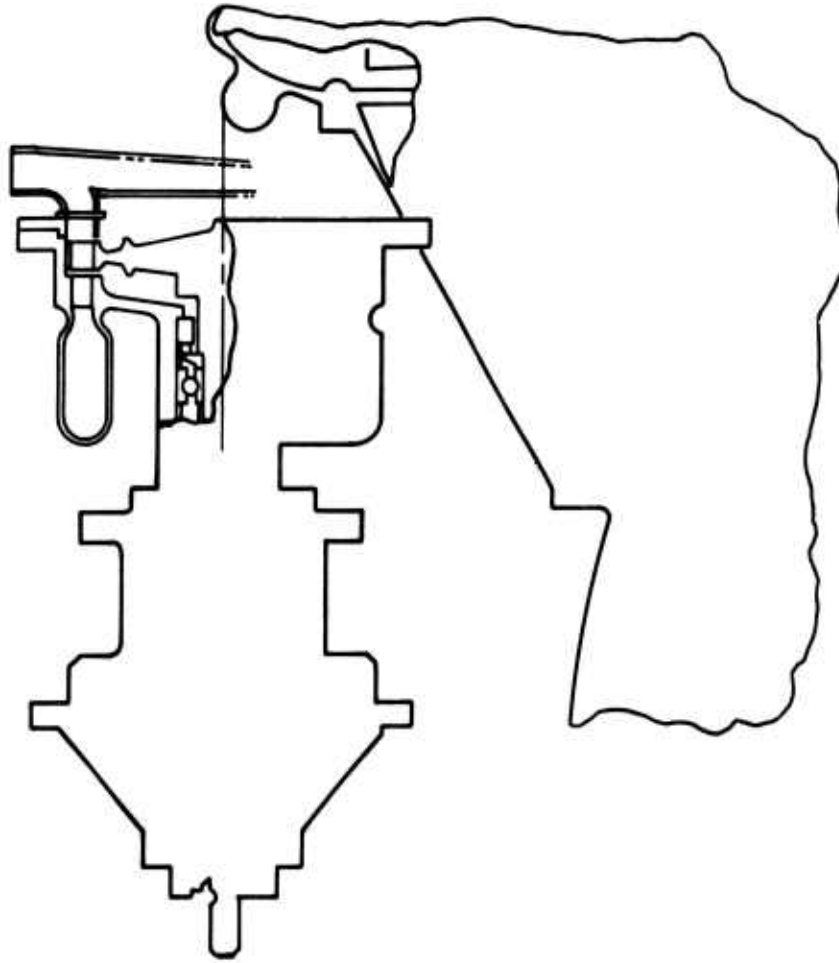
Tower Shaft and Pneumatic Turbine Drive Systems
